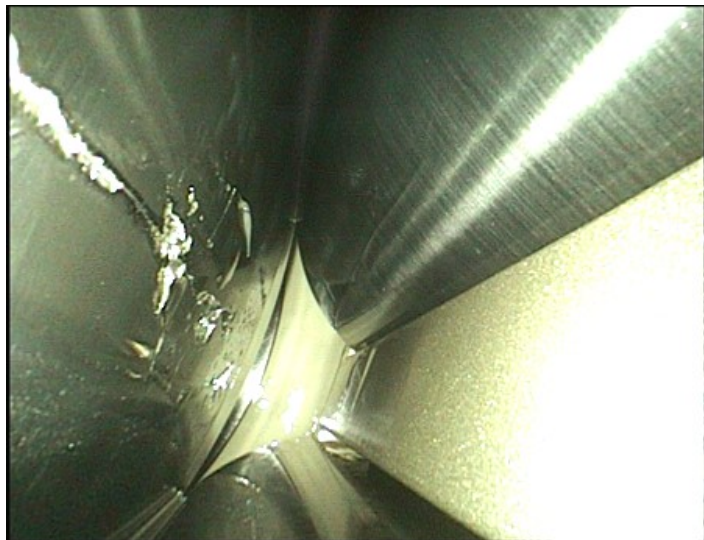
Figure A: Example of Damage to the Inner Race of a High Speed Bearing Documented with a Borescope.
